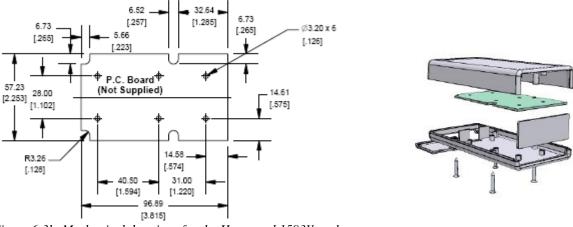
Mechanical drawings for the Hammond 1593Y enclosure.
